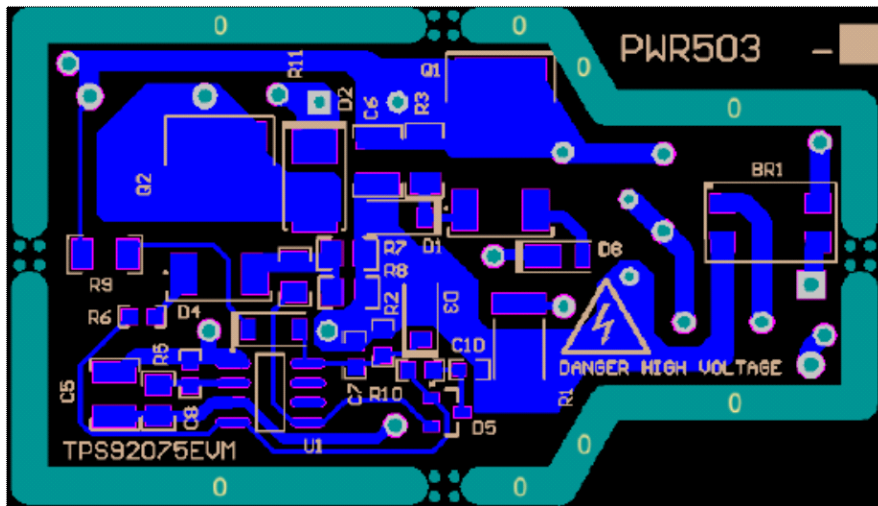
TPS92075 Buck-Boost Bottom Copper (PCB is Single-Sided Copper)
